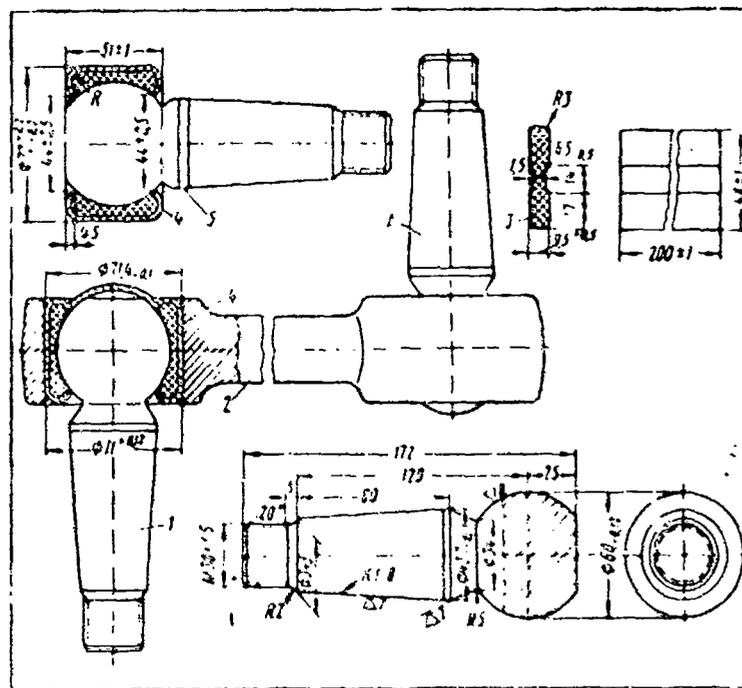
ZIL-131 Truck Torsion Rods with Bearing Pins: 1, bearing pins, 2, torsion rod, 3, fiber insert, 4, insert ring, 5, bearing pin assembled with ring (for repair).
